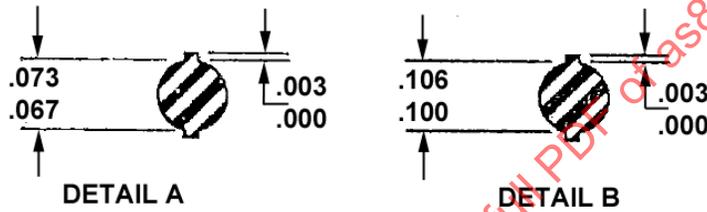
B - CONNECTOR ADAPTER, STRAIGHT (DETAILS A AND B)
